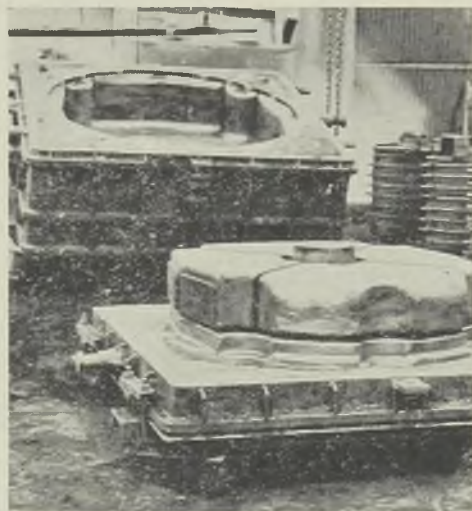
MOULD FOR BALL-BEARING COVER.
